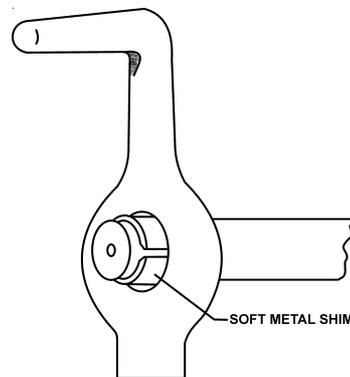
, A soft metal strip between dog screw and workpiece prevents damage to work.
